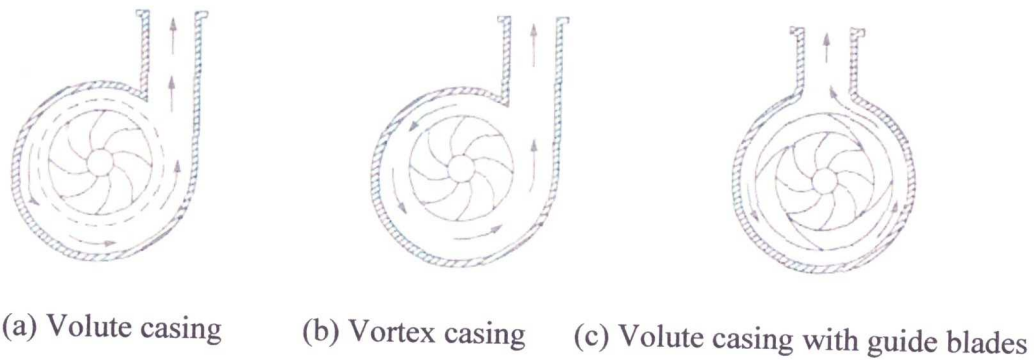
Types of casing for the Impeller of a Centrifugal Pump.
